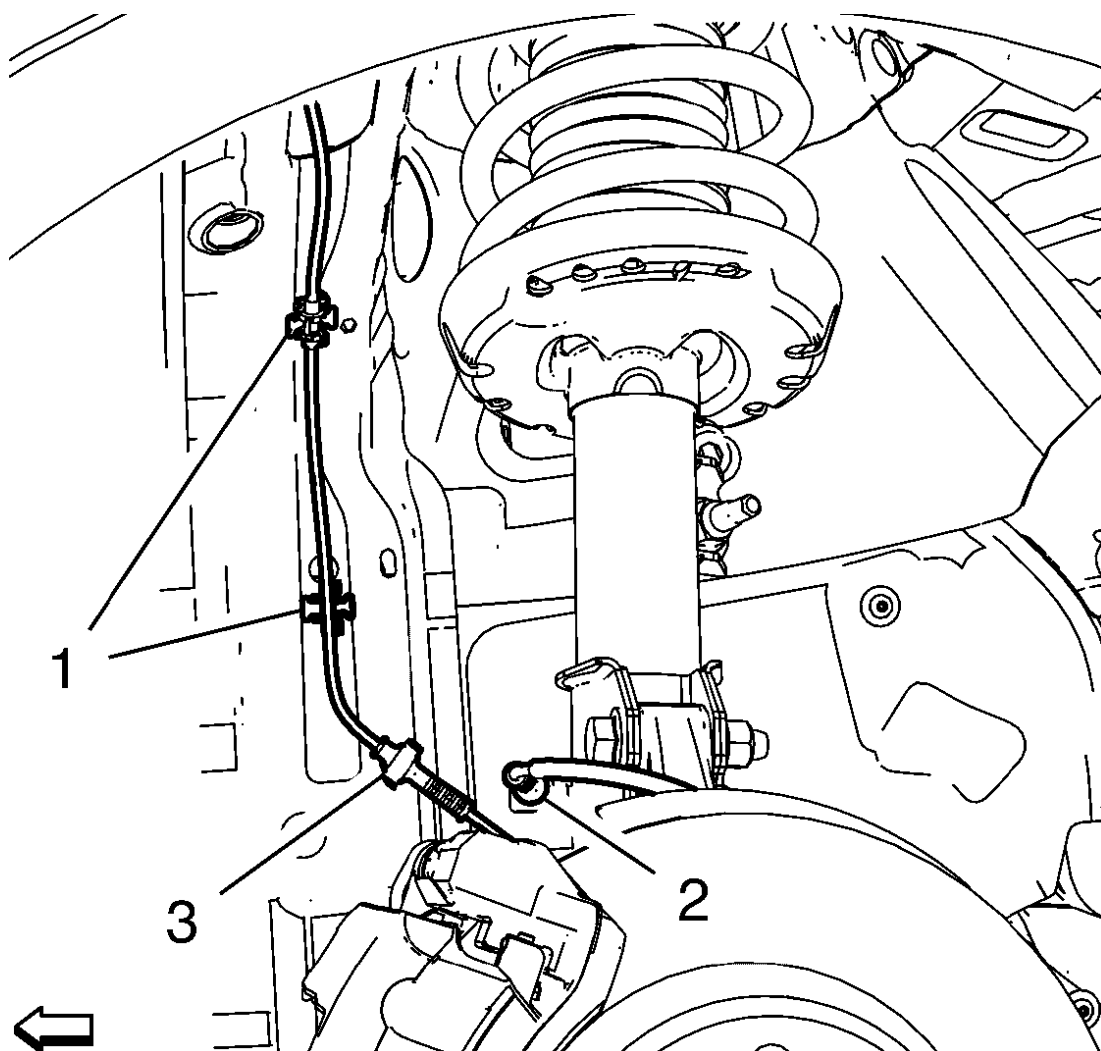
Front Wheel Speed Sensor Wiring Harness
